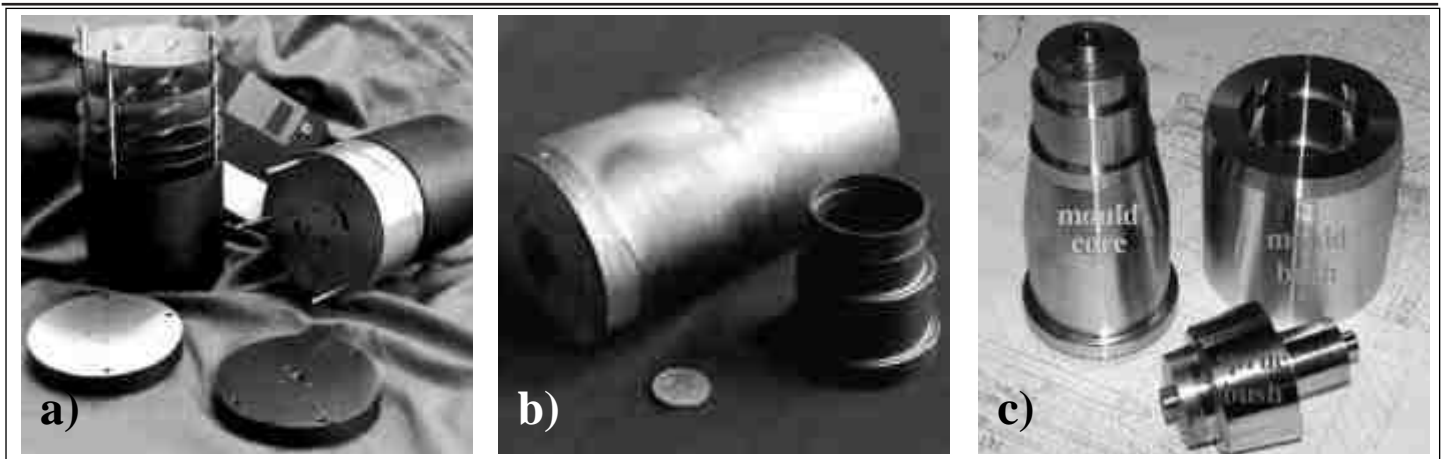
(a) the stacking of the sheets in preparation for diffusion bonding; (b) the bonded mould prior to finishing; (c) the finished mould inserts
